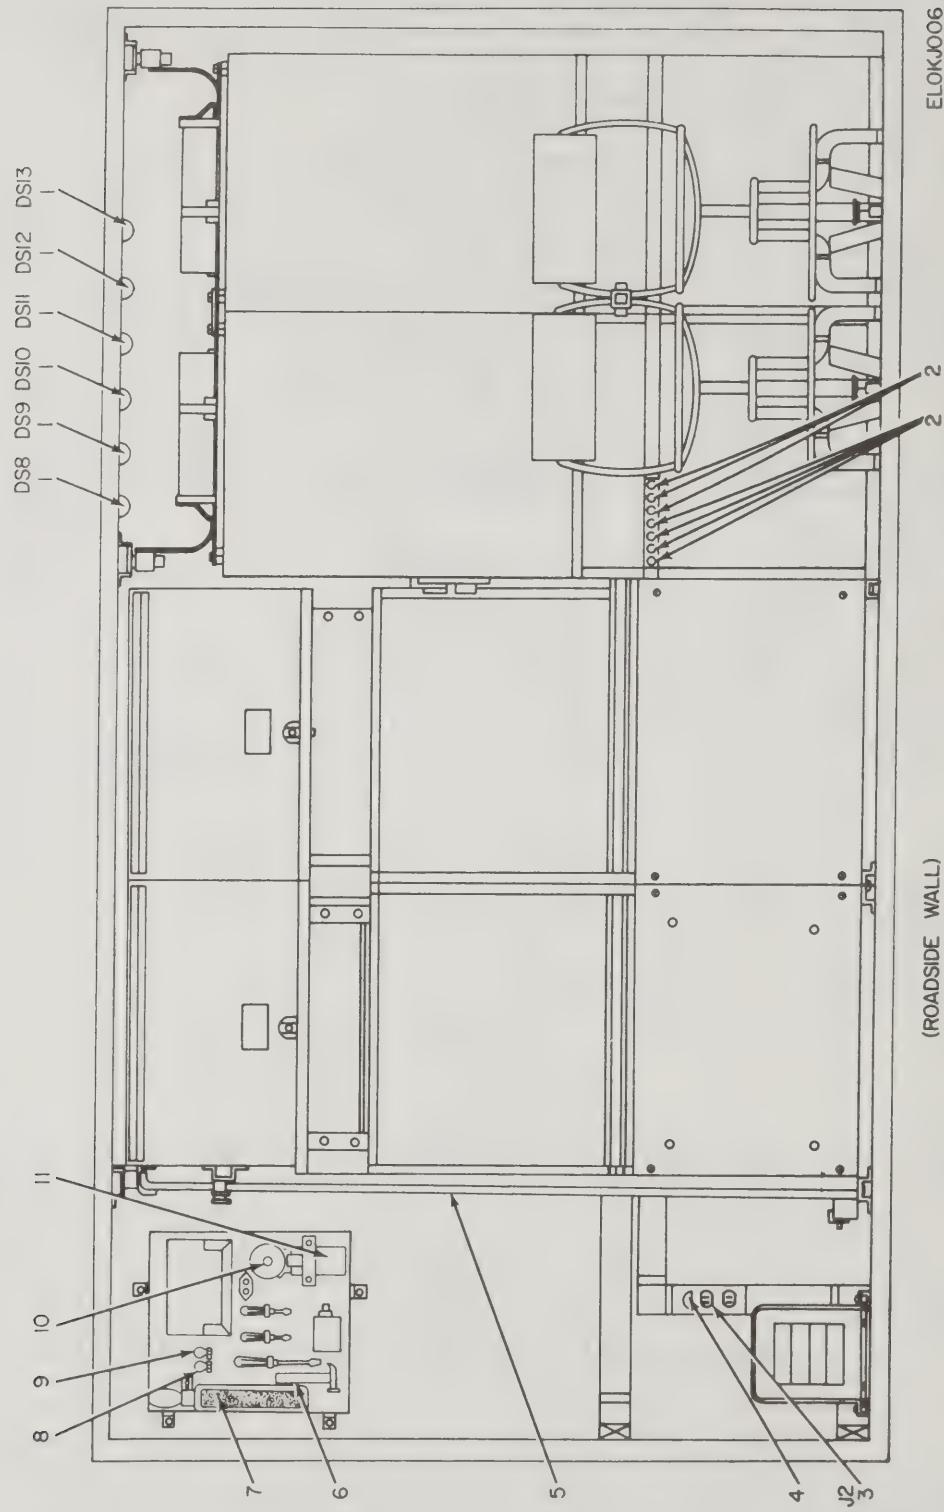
Shelter Facility S-376/TTC-23, Roadside Wall.
